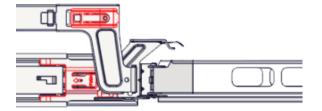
Top and Bottom Cable Management Assembly Connectors (Upper Arm)
